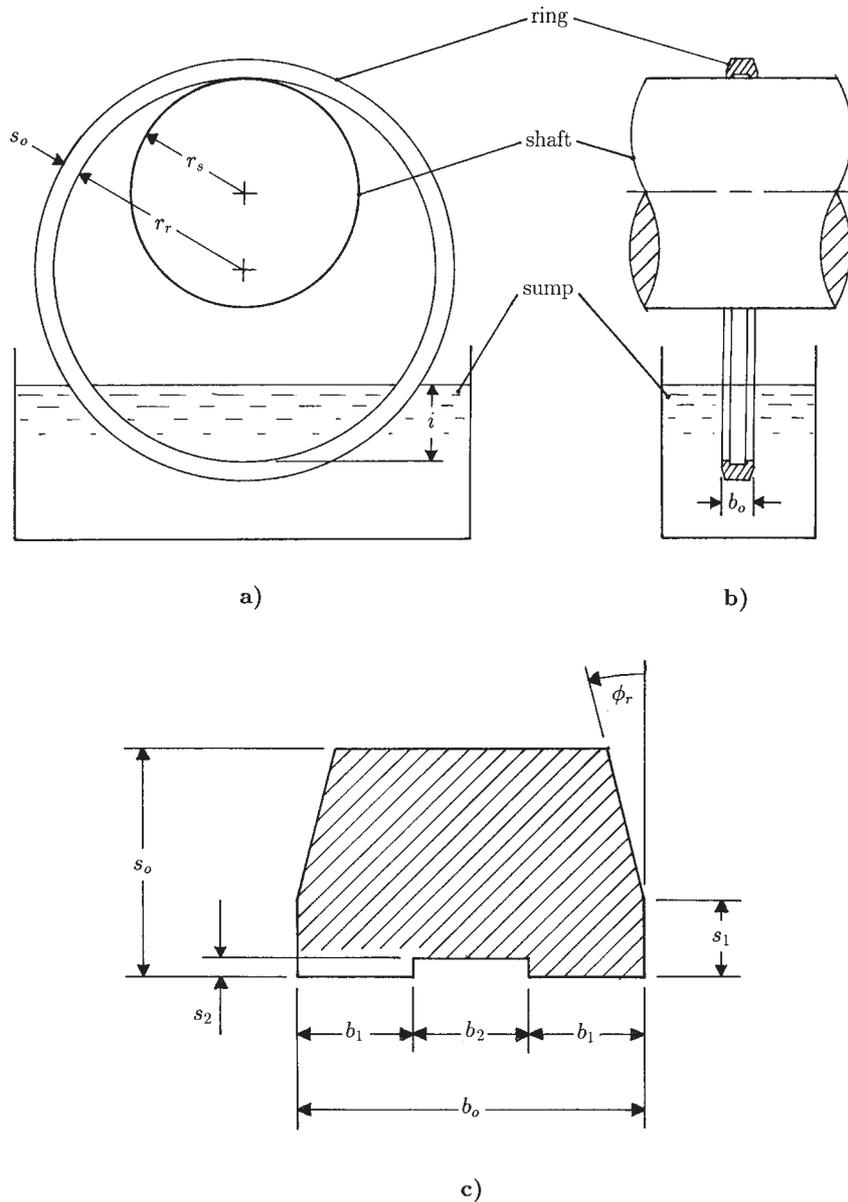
Definition diagram of a loose-ring lubricator: (a) side view; (b) front view; (c) cross-sectional view
